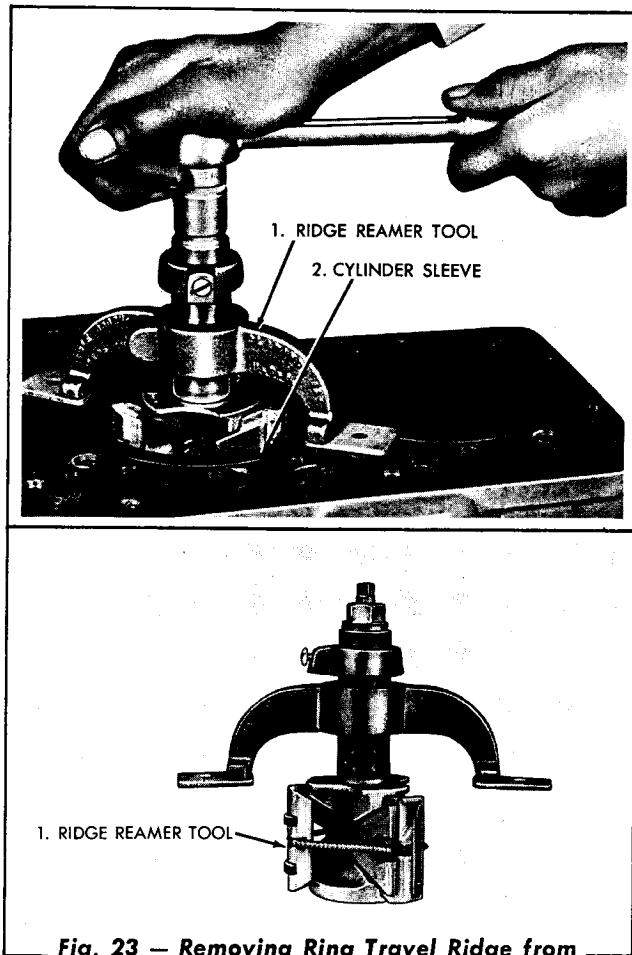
Removing Ring Travel Ridge from Cylinder Sleeve
